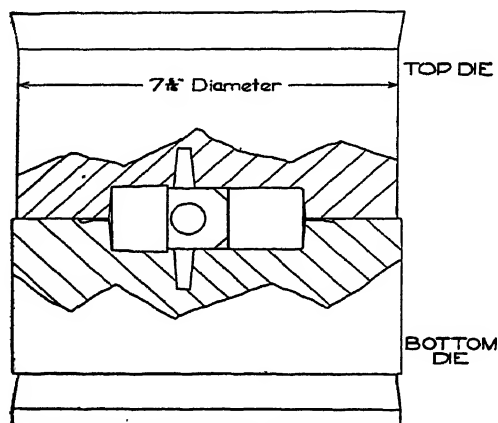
TWO-PIECE DIE FOR PRESSING BRASS VALVE BODY SHOWN IN FIG. 8.
